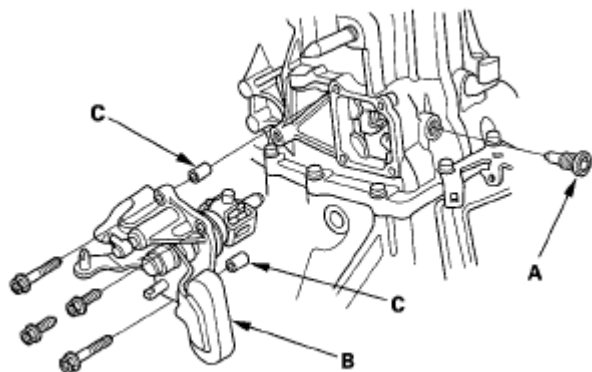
Identifying Interlock Bolt, Lever Assembly And Dowel Pins
